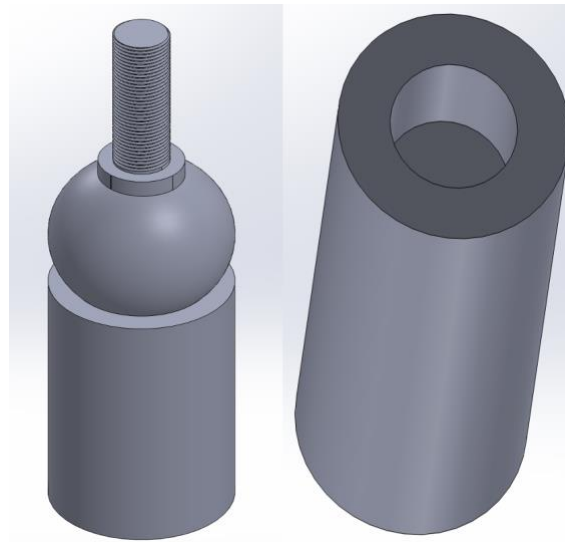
3D CAD Model of Universal Joint (Left) and Pinion Coupling Part (Right)
